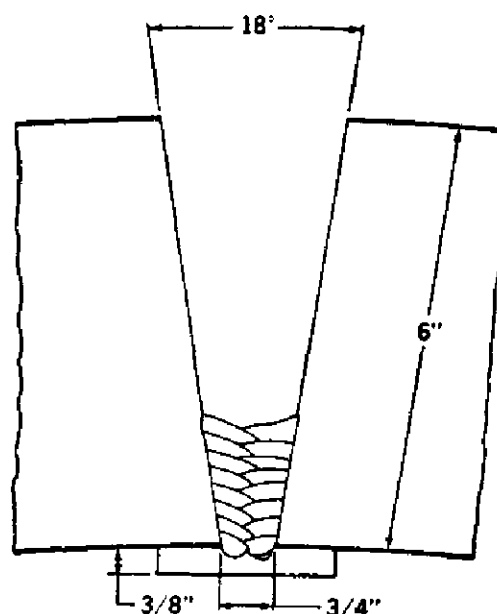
Joint design for multipass welding a 6 in. thick shell course for a nuclear steam generator.
